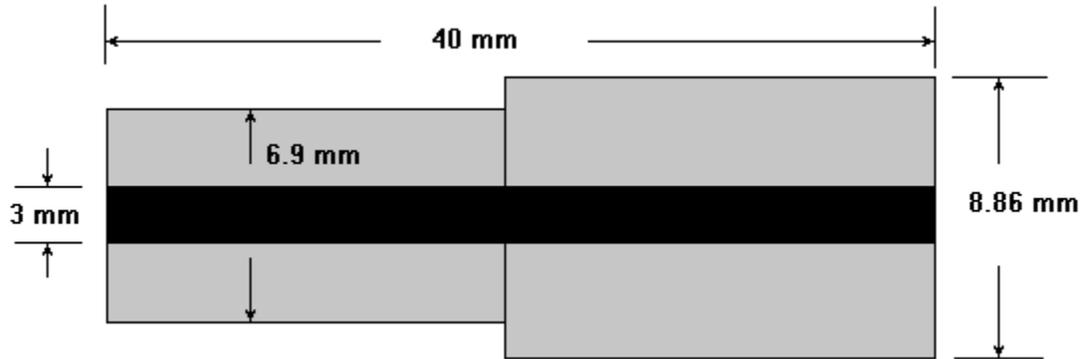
The longitudinal cross-sectional view of the coaxial step structure.
